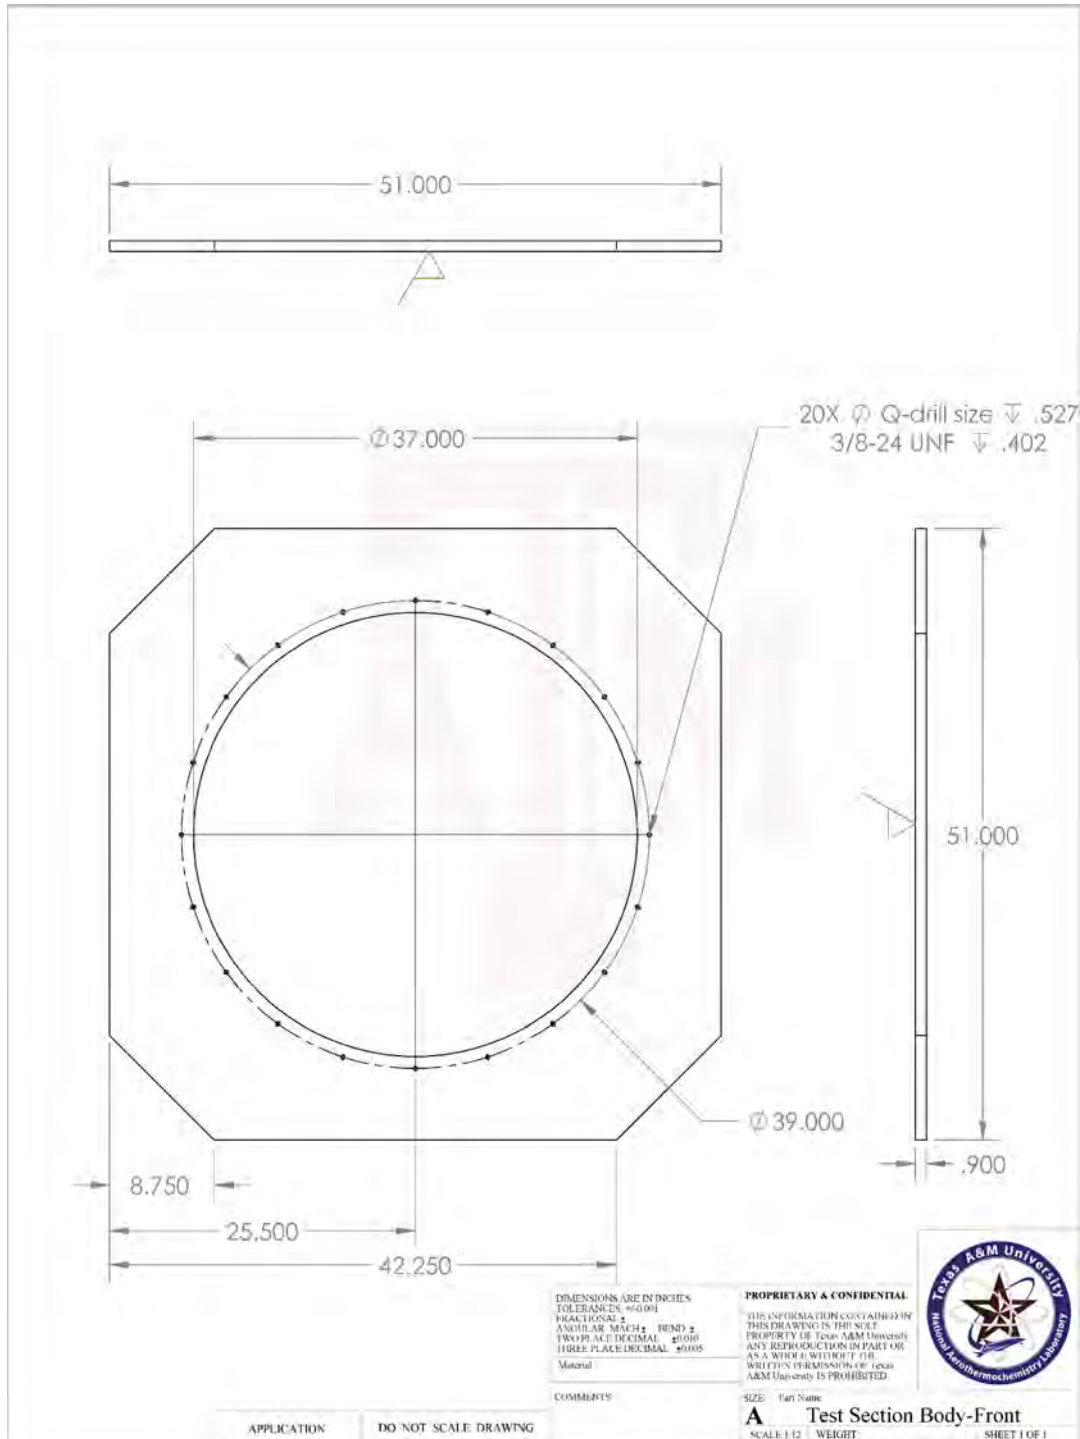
DIMENSIONAL DRAWING FOR THE FRONT PLATE OF THE TEST SECTION SKELETON.
